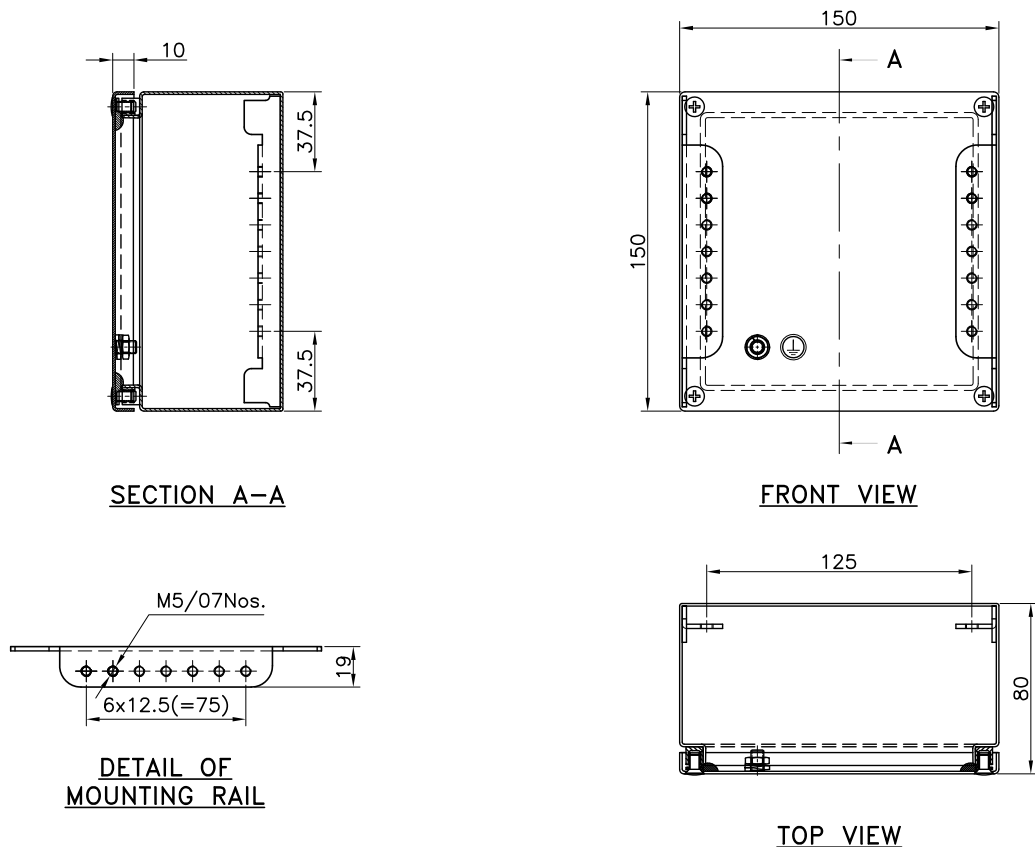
Dimensional drawing of the stainless steel case used to house a single module from the multistage extraction platform.¹⁶⁸
